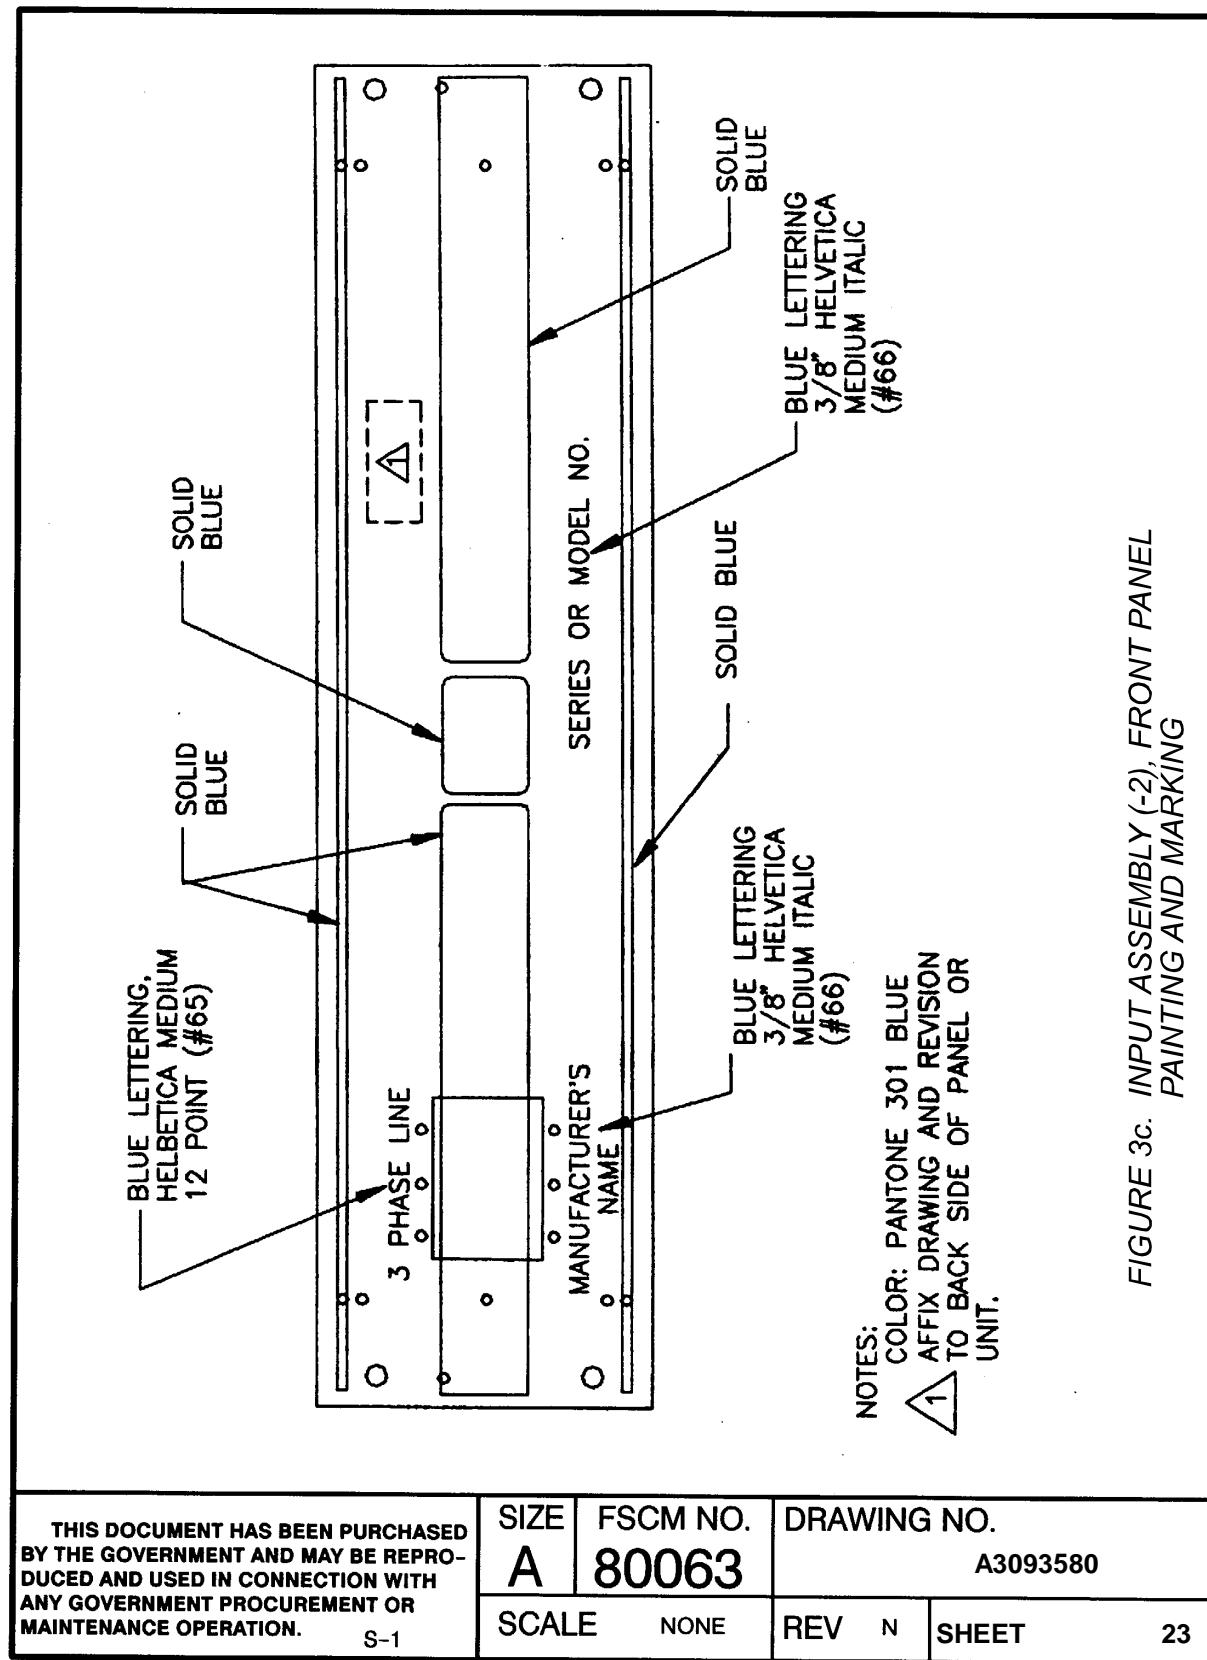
INPUT ASSEMBLY (-2), FRONT PANEL
